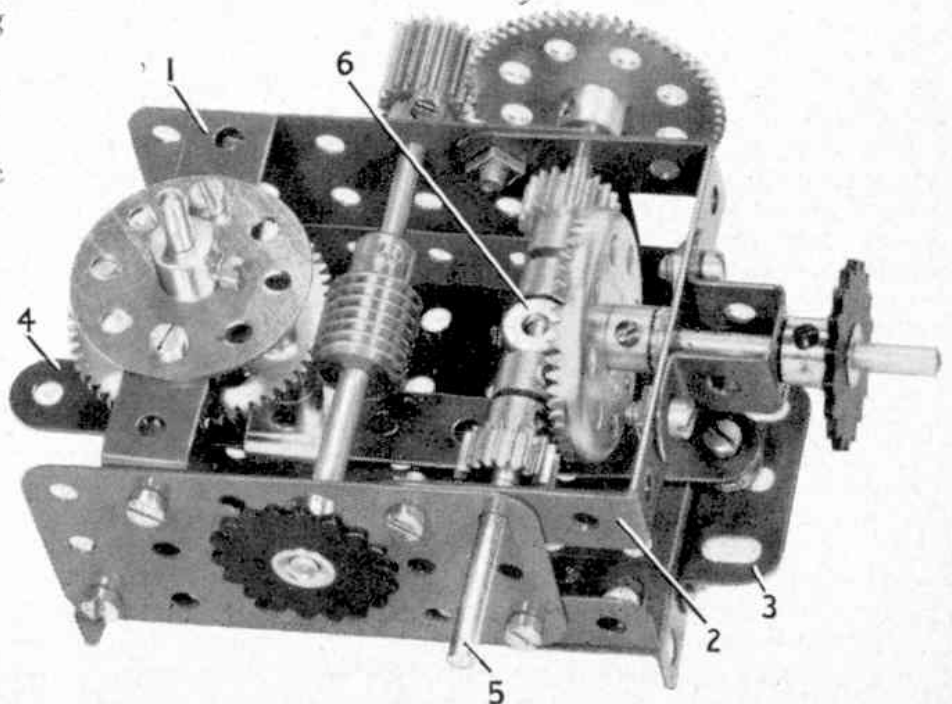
An automatic reversing mechanism designed by Mr. G. Bowker, Bolton.
